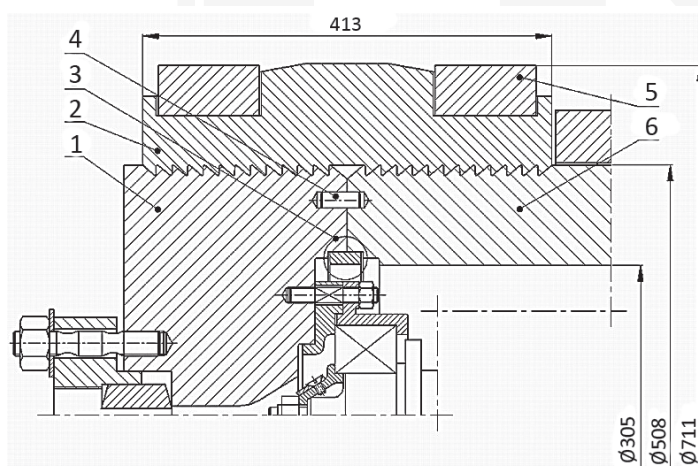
Engineering example of the joint between the vessel wall and reactor head: 1 – head, 2 – sectional clamping rings, 3 – wave-ring gasket, 4 – locating pin, 5 – grips, 6 – cylindrical shell
